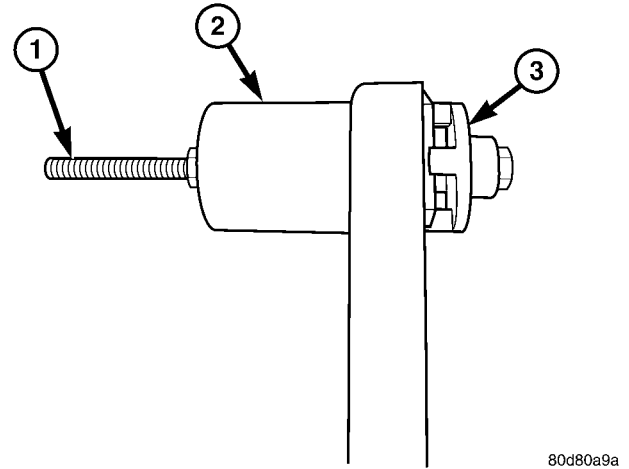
UPPER SUSPENSION ARM BUSHING - INSTALLATION
